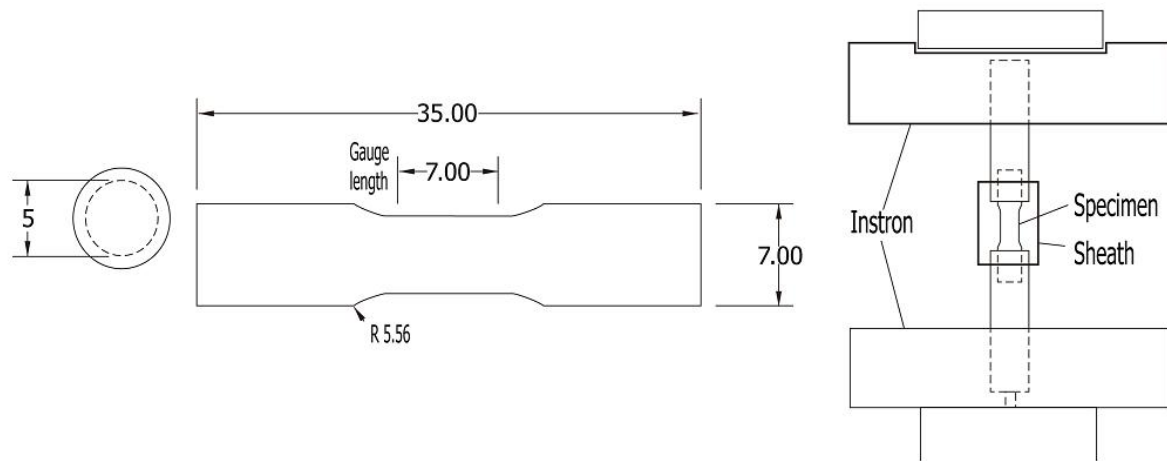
Details of specimens and their orientation in the testing machine. All dimensions in millimetres.
